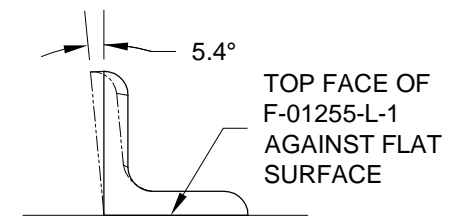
FINISHED TWIST & OPEN (FRONT VIEW)
